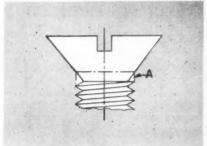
Another method of eliminating the imperfect thread directly under the head of the screw is depicted in this sketch.
